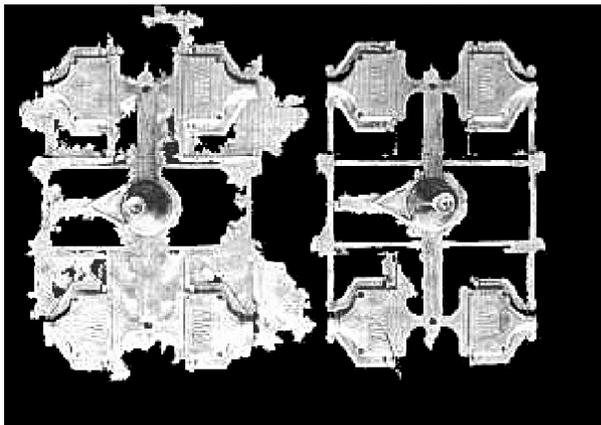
Casting produced with (right) and without (left) shot control on a 200-ton hot-chamber machine
